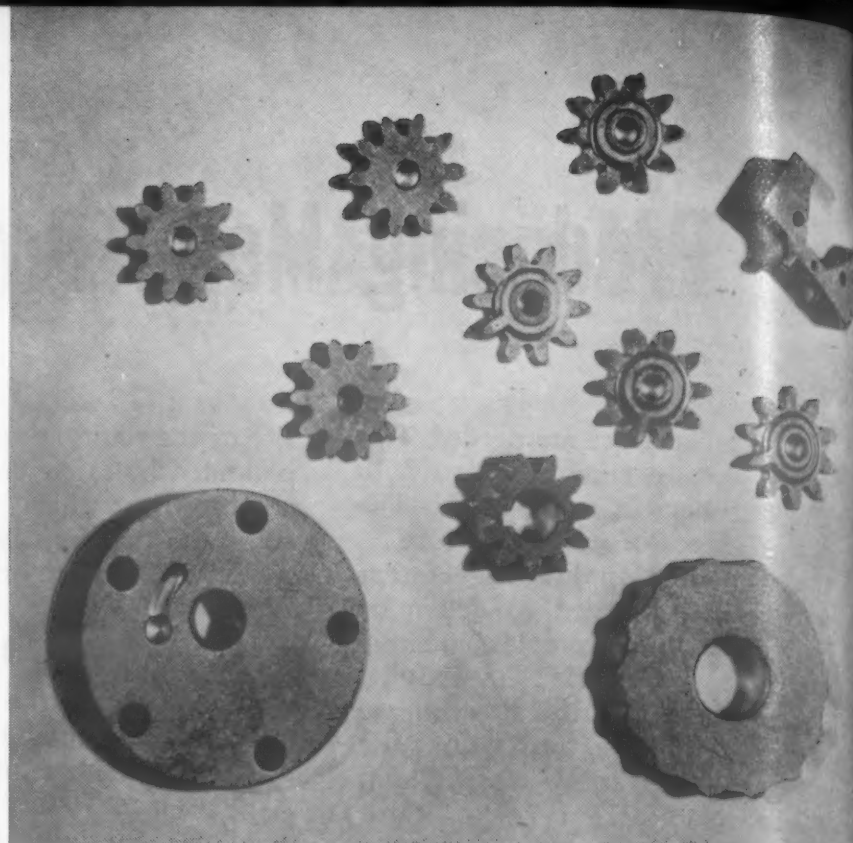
Sintered iron adding machine parts, plastics-impregnated before cadmium plating, show no corrosion after 5 months exposure to the atmosphere.
